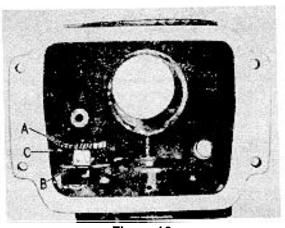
A - Governor Gear Assembly B - Governor Gear Shaft C - Governor Stop Screw
